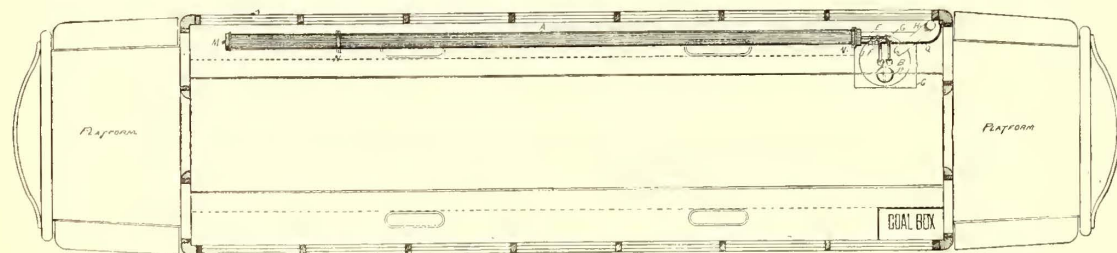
PLAN OF CAR EQUIPPED WITH GOLD'S HEATER.
